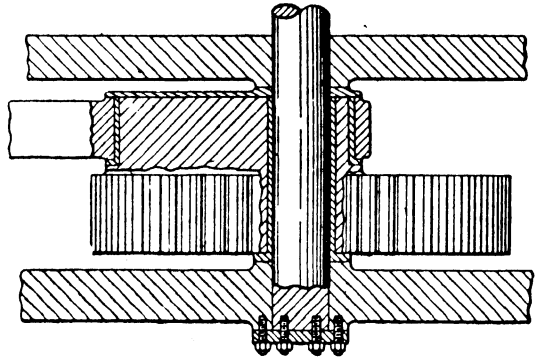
SECTION OF ECCENTRIC INTEGRAL WITH THE BULL GEAR WHICH REVOLVE OVER A NON-ROTATING LARGE PIN
